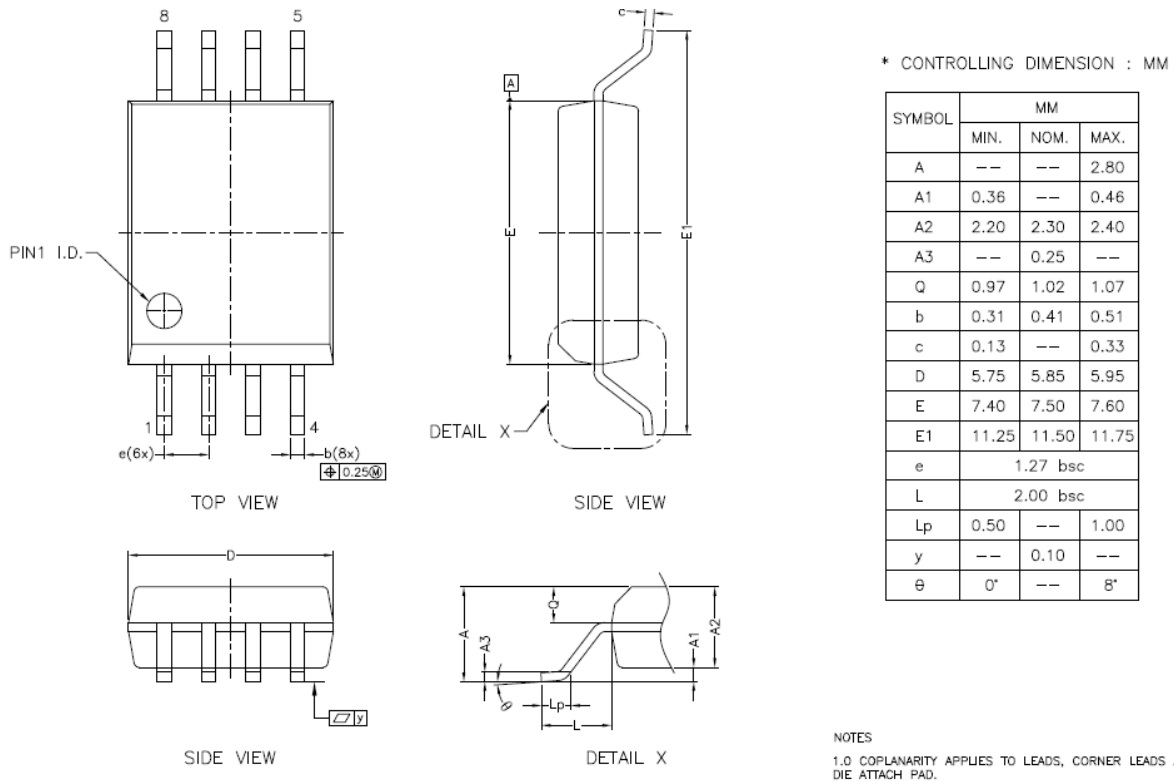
SOW8 Package Shape and Dimension in millimeters
